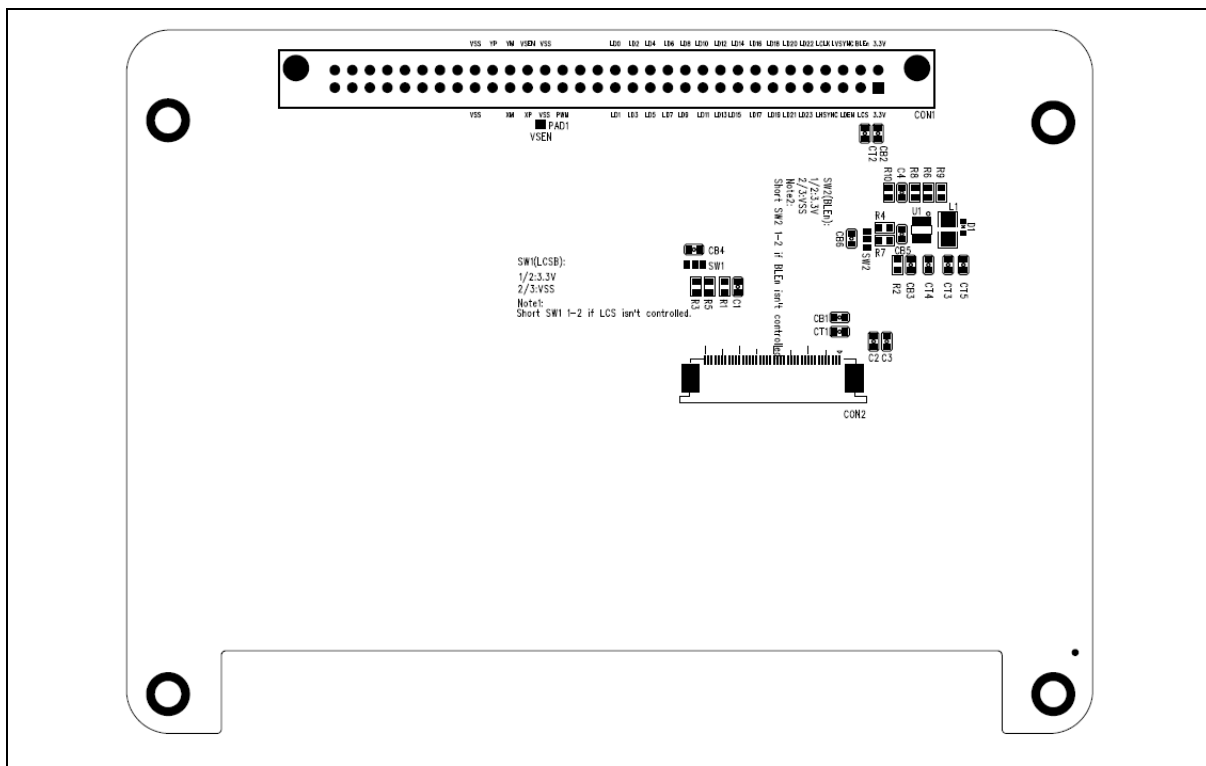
NuDesign-TFT-LCD5 PCB Placement (Rear View)
